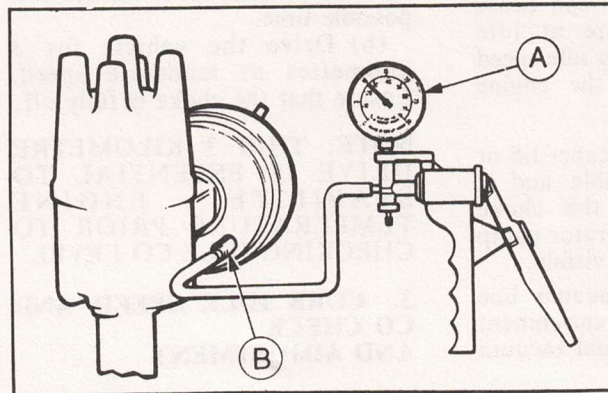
Checking vacuum retardation (Surrounding components omitted for clarity)
